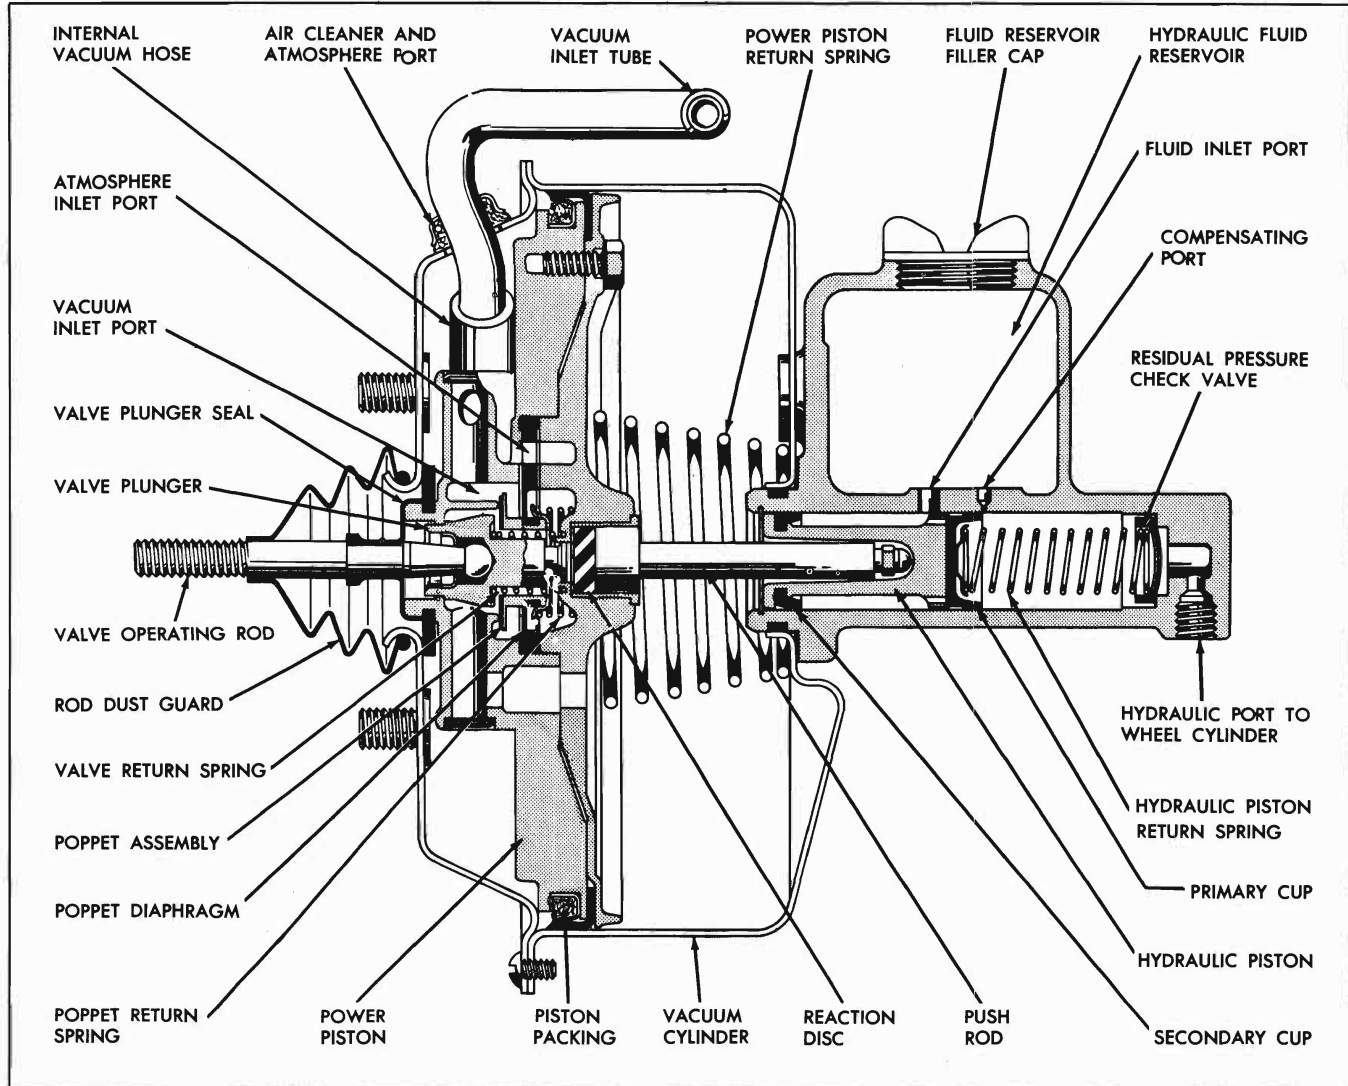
B-2 Bendix Power Brake Cross Sectional View
